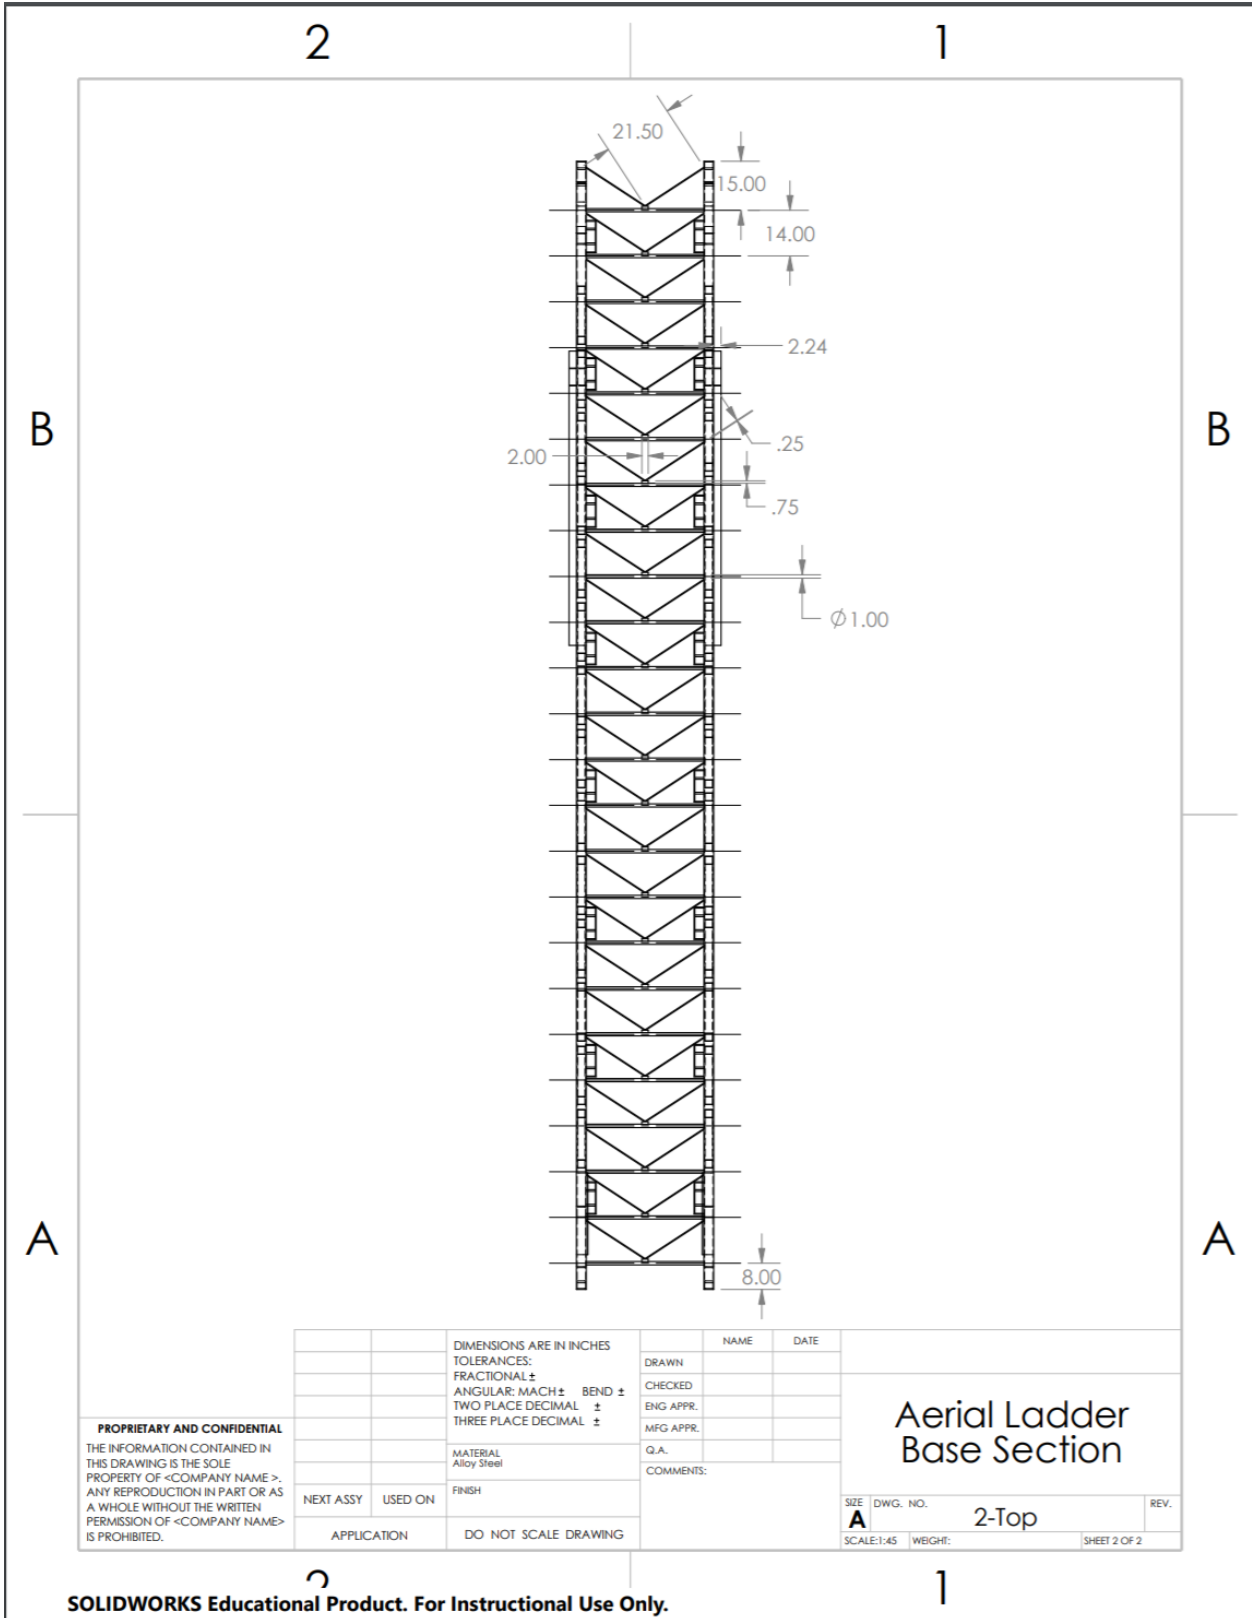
Top View of the Dimensioned Drawing of the Base Section of the Aerial Ladder
